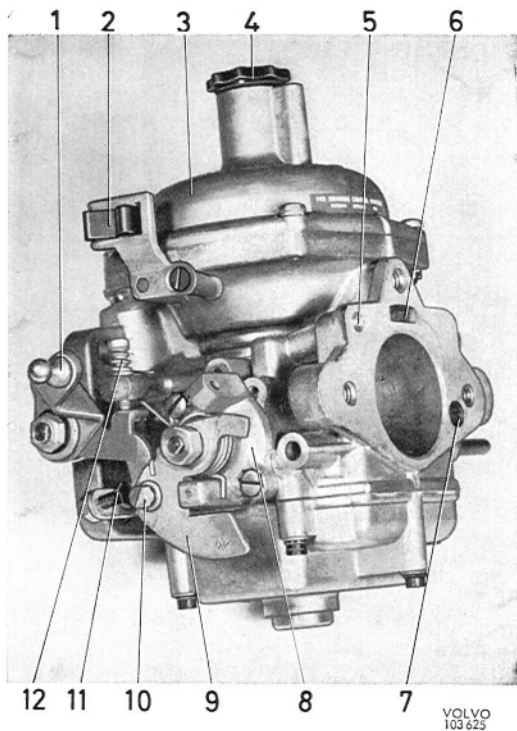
Stromberg carburetor, left side, B 20 A
